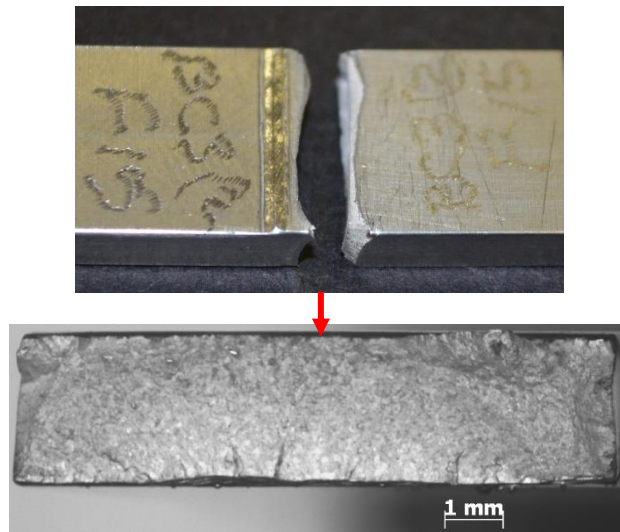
Representative macrograph of fracture surface of as-welded specimen that has failed at the weld toe.
